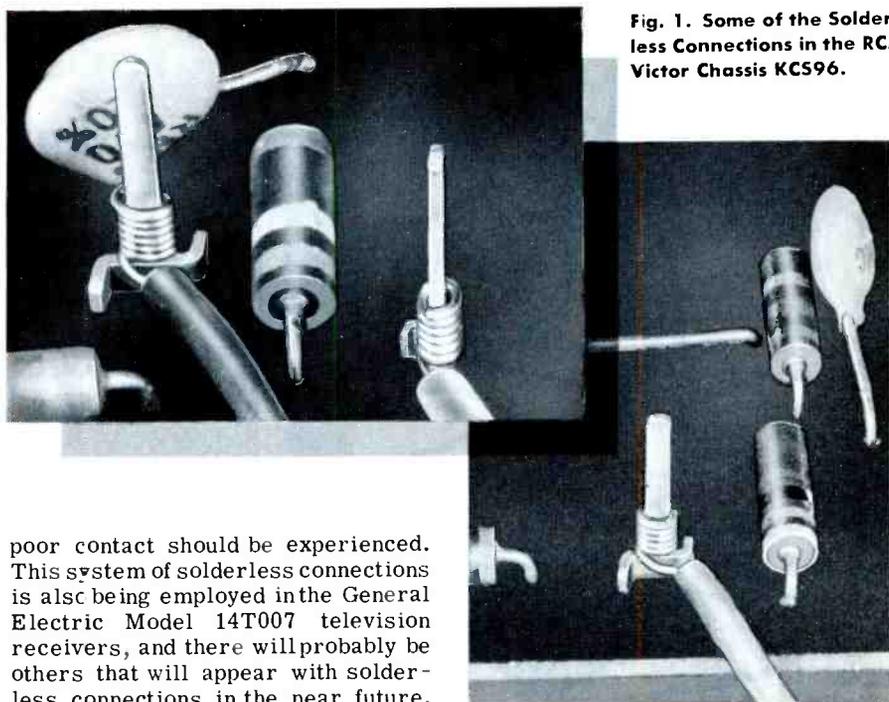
Some of the Solderless Connections in the RCA Victor Chassis KCS96.
